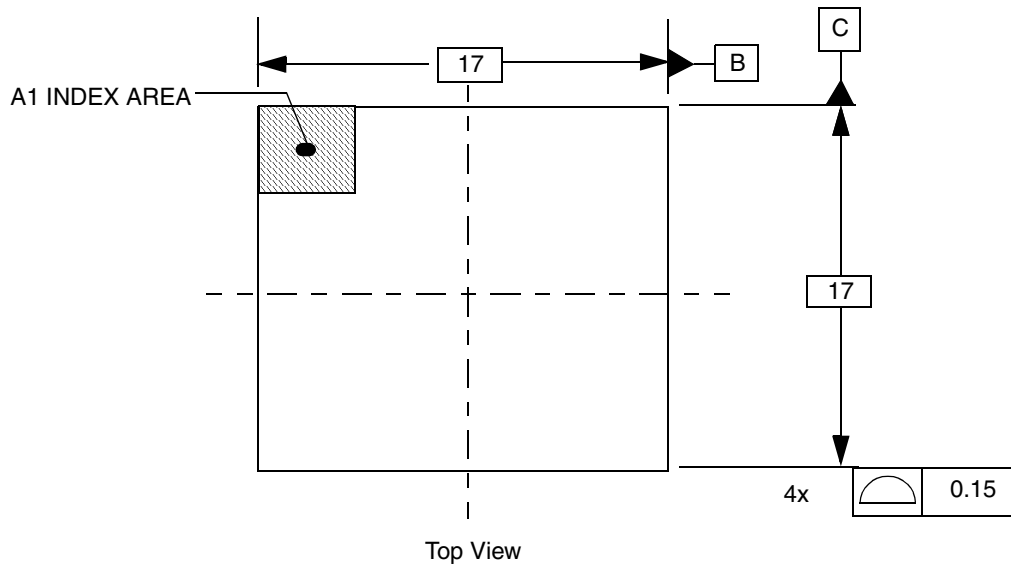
400 MAPBGA 17x17 mm Package Top view
